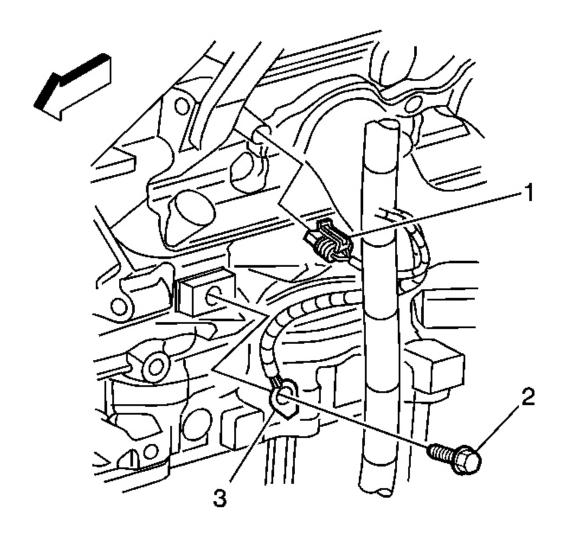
View Of ECT Sensor Electrical Connector And Ground Courtesy of GENERAL MOTORS CORP.
